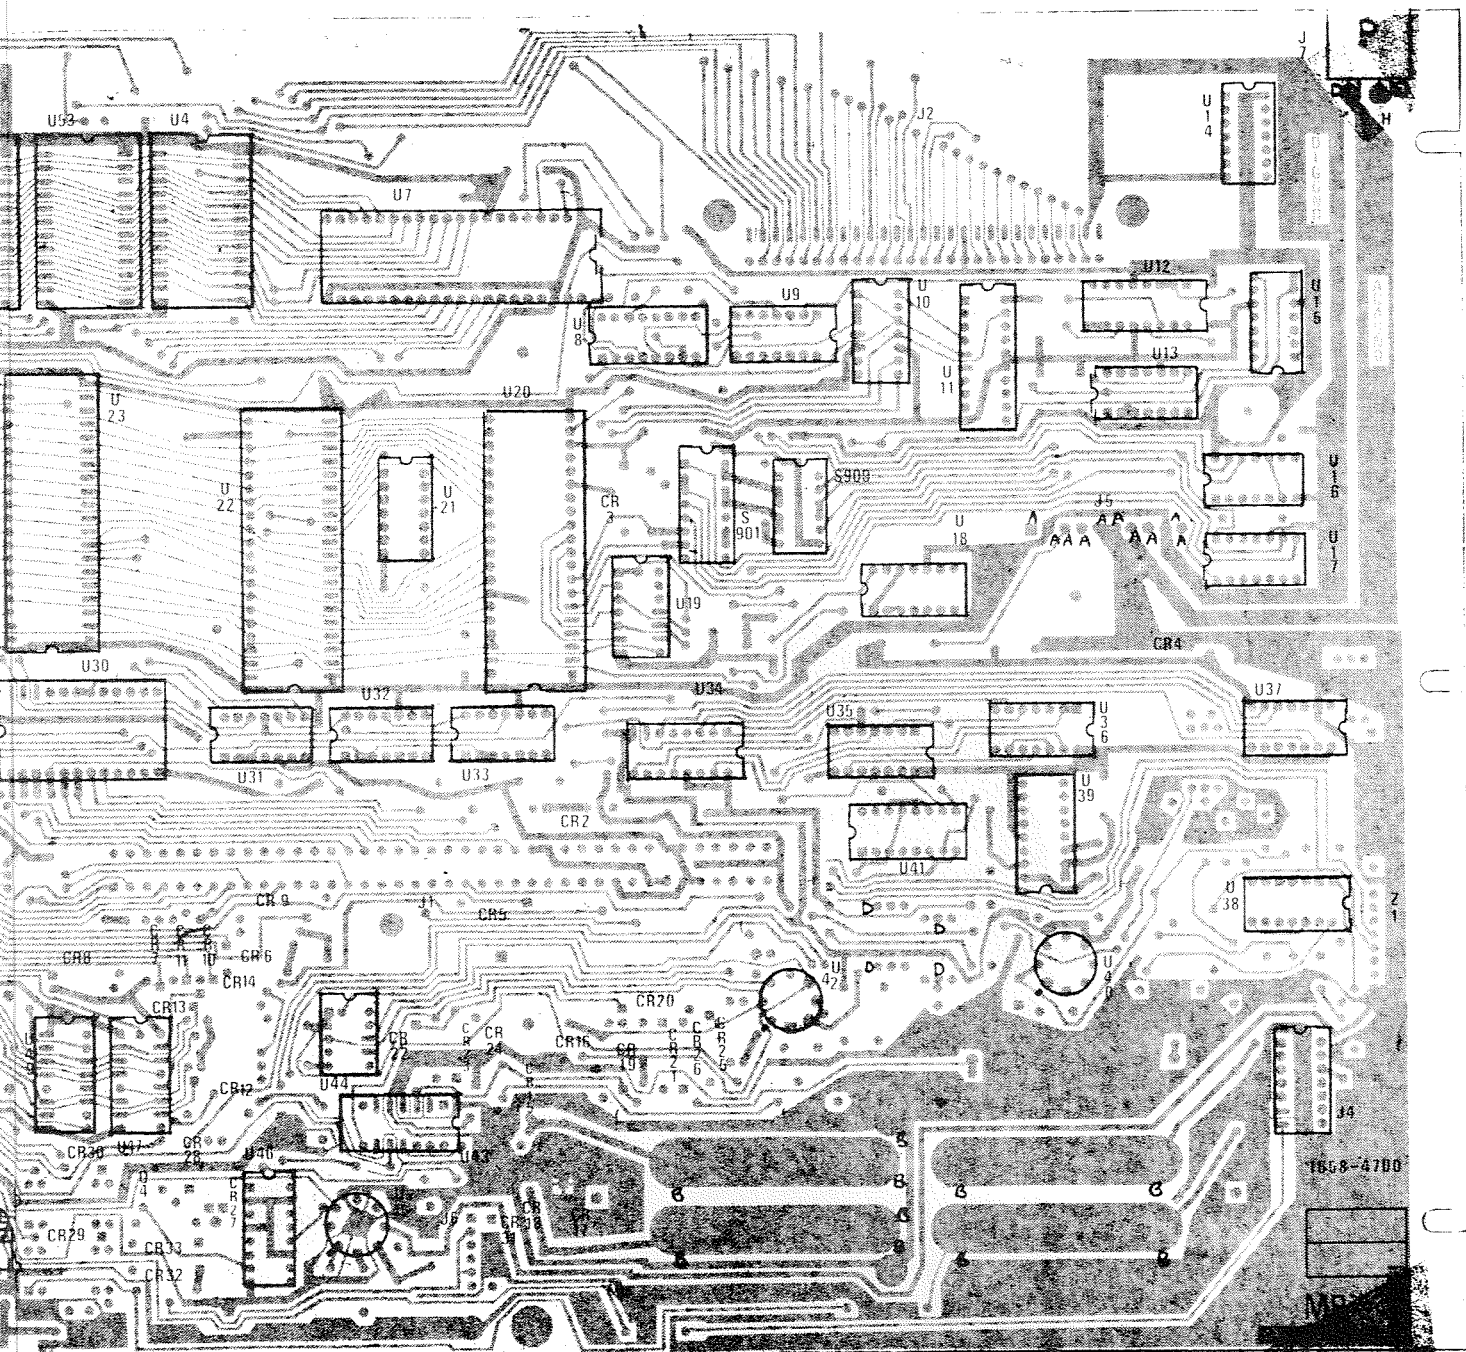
Main (MB) board, 1658-4700, integrated-circuit locator.
